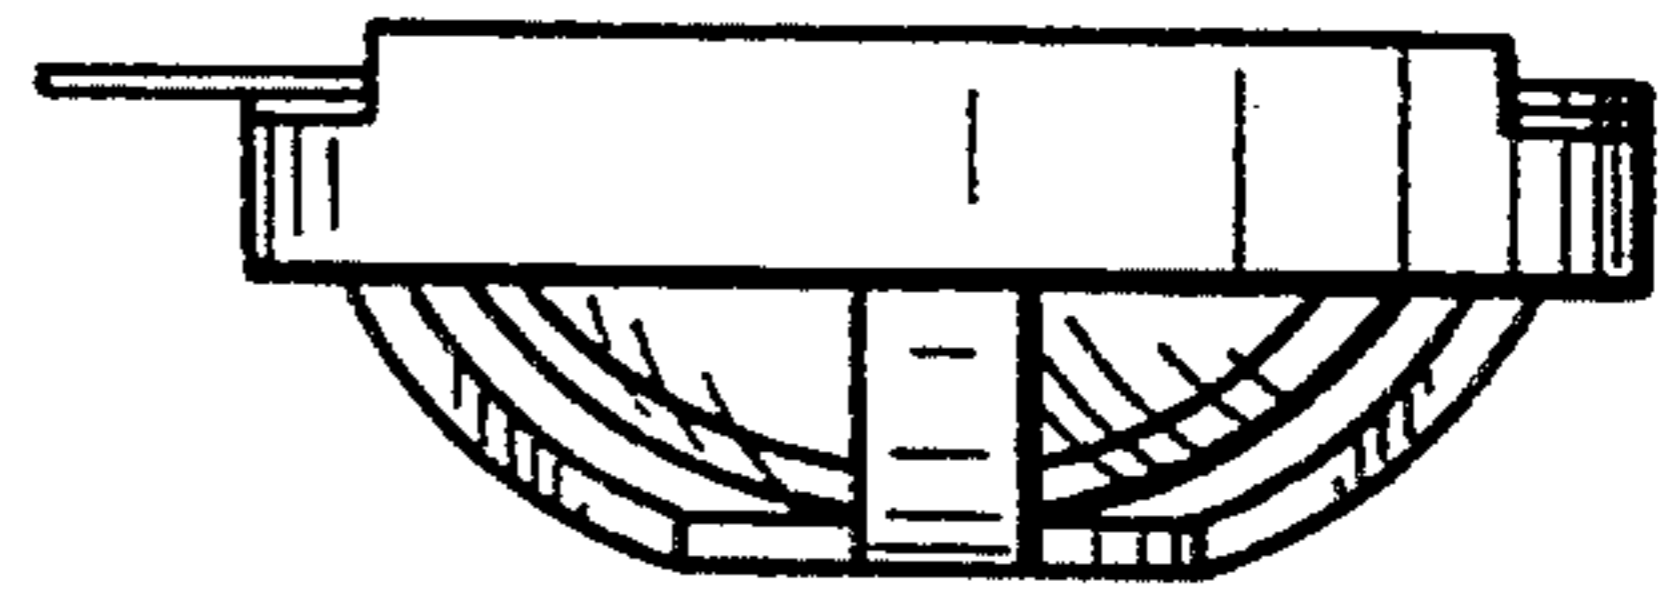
is a perspective view of a contact lens package showing our new design;
